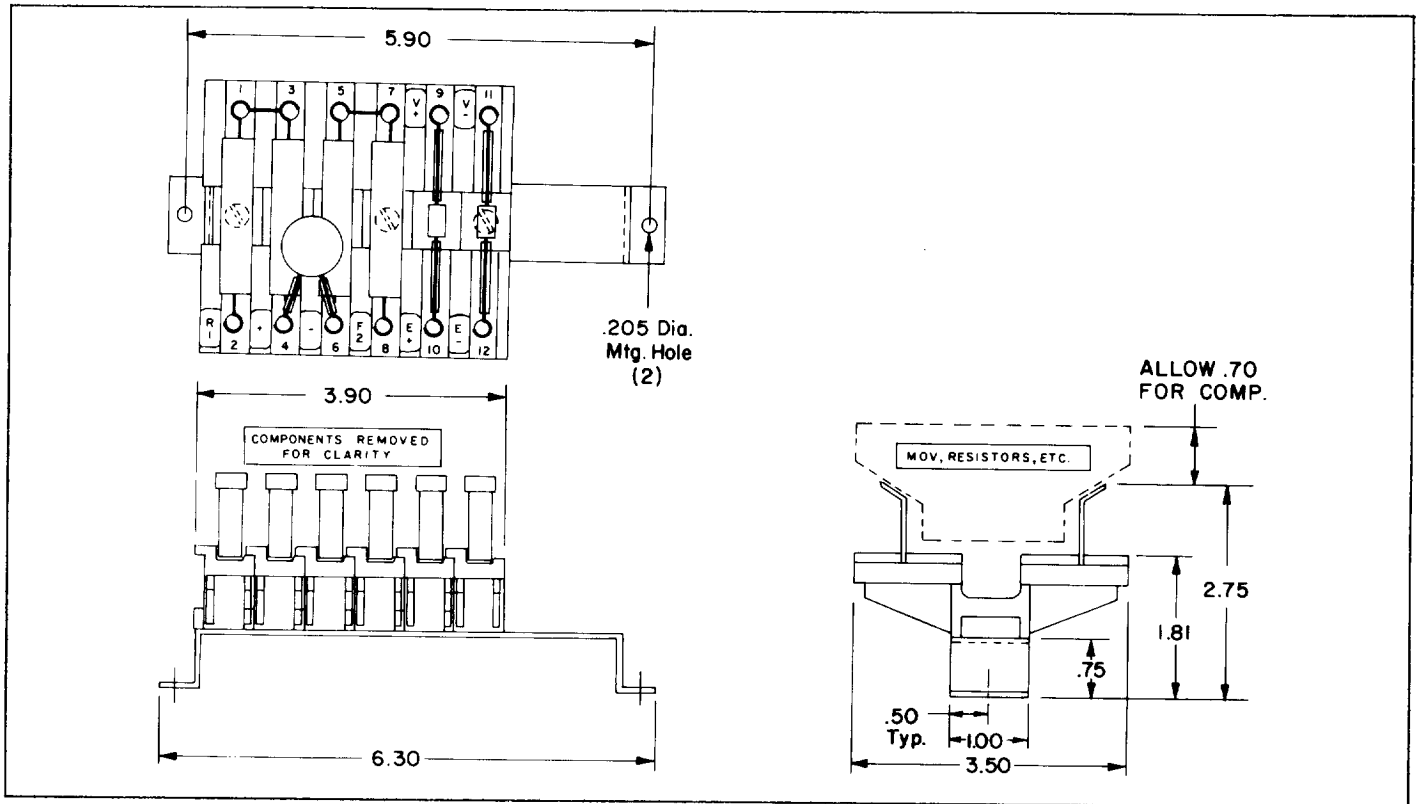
Separate resistor assembly outline. Cat. No. 55B529836G1, G2, G3, and G4
